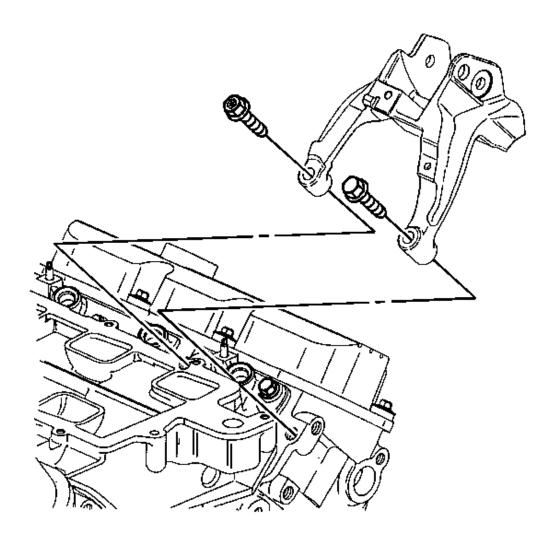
View Of Lower Engine Mount Bracket Courtesy of GENERAL MOTORS CORP.
